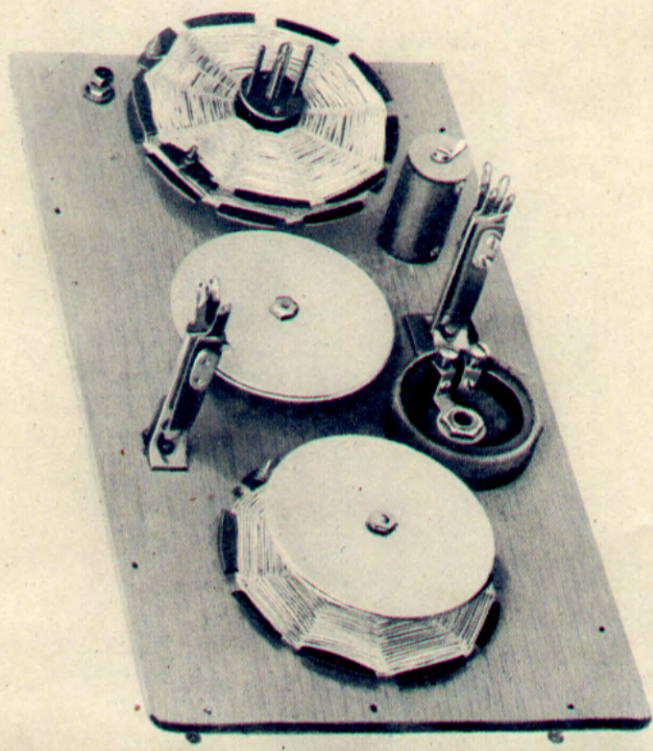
Back of wooden panel with the components mounted ready for bolting to the base-frame. The lower jack is for the telephones. When its plug is withdrawn the third valve lights up
